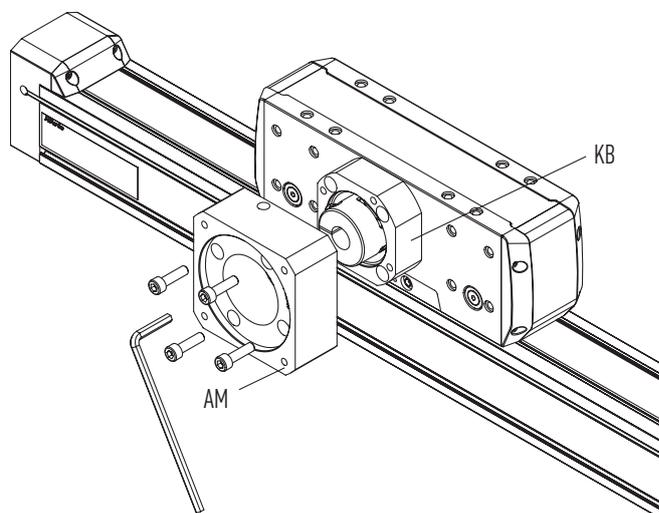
Mounting the motor adapter plate AM (HC-B)
